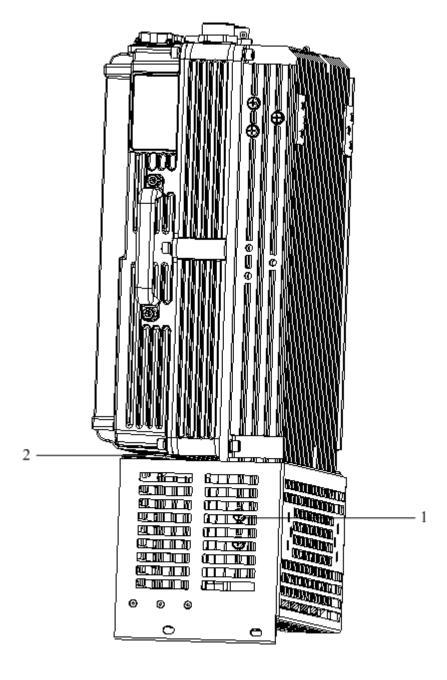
LOWER FIXING FRAME INSTALLATION
